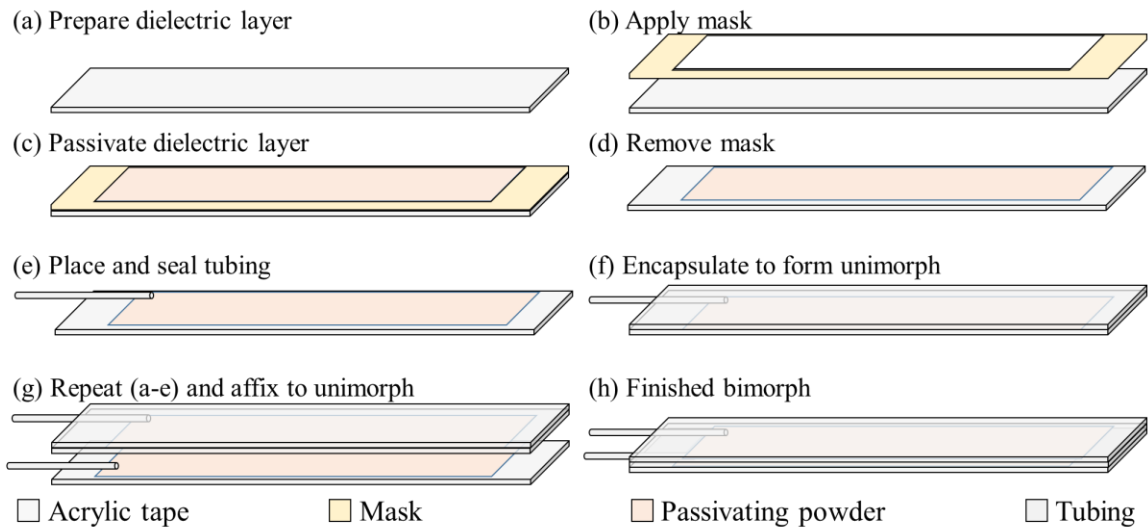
Bi-direction fluid electrode DEA fabrication. (a-h) The actuator is fabricated in eight steps: (a) Prepare the first acrylic adhesive layer; (b) add a mask patterned using a laser machining system; (c) apply a passivating layer to define the active area; (d) remove the mask; (e) place tubing for fluid and electrical connections and seal around tubing with silicone sealant, repeating steps (a-e) for bimorphs; (f) encapsulate with an additional acrylic adhesive layer, resulting in a unimorph fluid electrode DEA; (g) adhere unimorph to second partial structure created in step (e); and (h) resulting bimorph structure.
